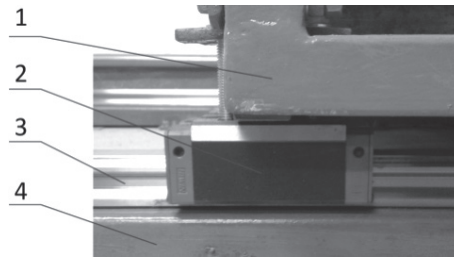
Attachment of guide block: 1 – frame, 2 – guide block, 3 – rail, 4 – support
